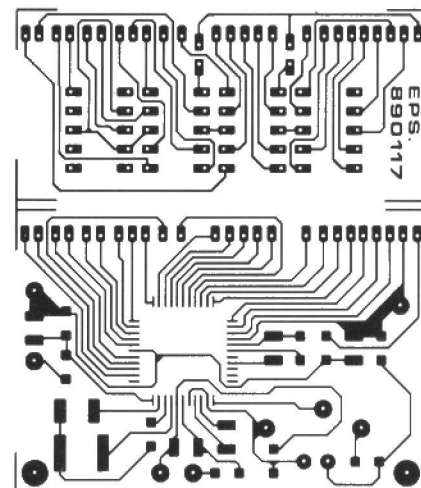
Track layout and component mounting plan of the printed-circuit board.
